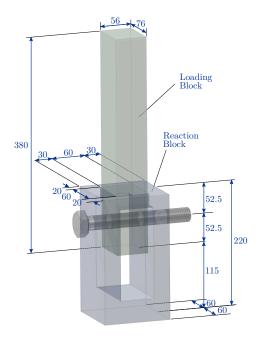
Schematic of bolt double-shear test assembly (dimensions in mm).
